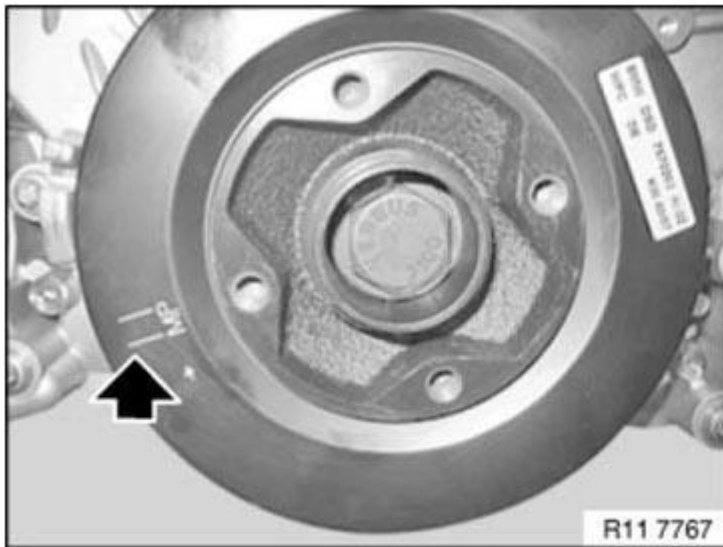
Identifying Mounting Position Of Special Tool 11 8 570
